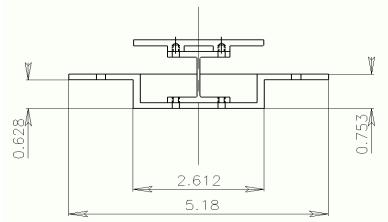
Cross-section of a puck (top part), flexure stage (middle part that is shaped like an I-beam), and cup (bottom part) that will be used to hold the gas-fusion mirrors in place. Three such assemblies will be employed with the soft-axis of each directed at the center of the mirror.
